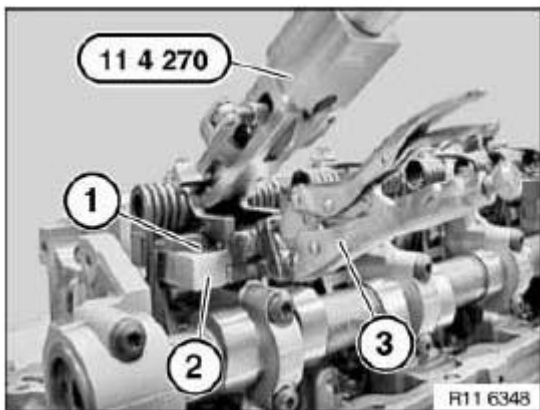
Identifying Special Tool (11 4 270) And Guide Block
